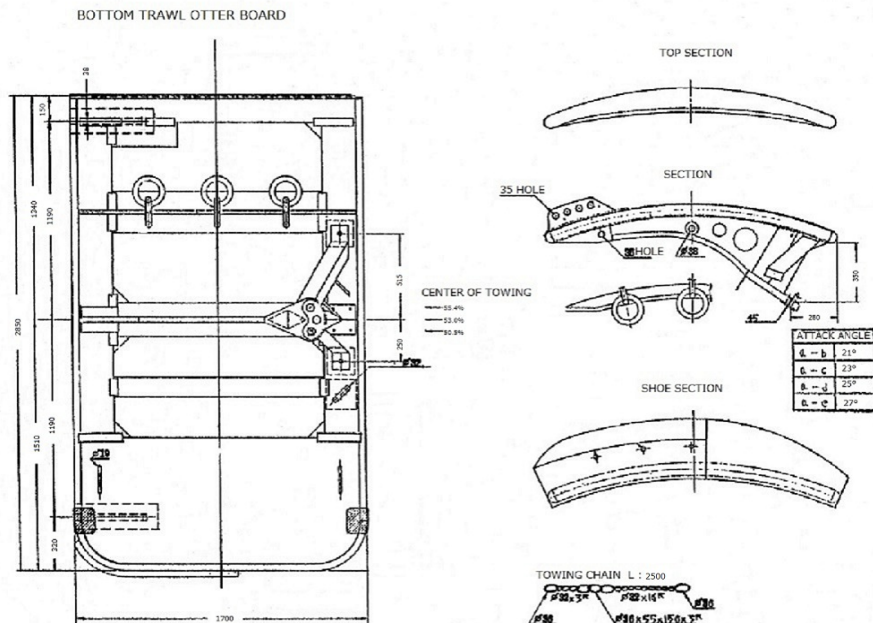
OTTER BOARD FOR BOTTOM TRAWL (FISH)
